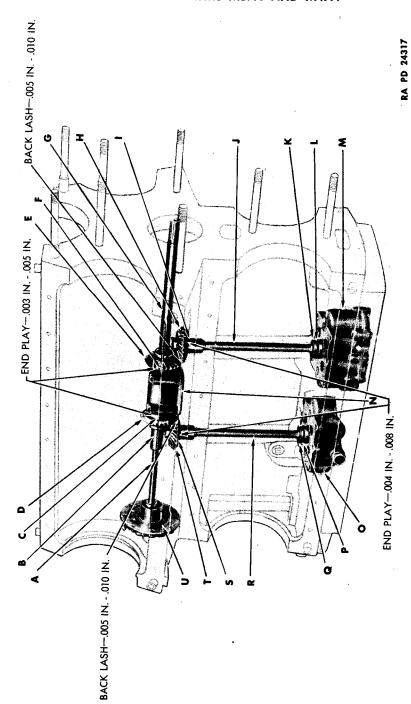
Accessory Drive Shaft, Fuel Pump Drive Assembly And Oil Pumps In Position In Crankcase
